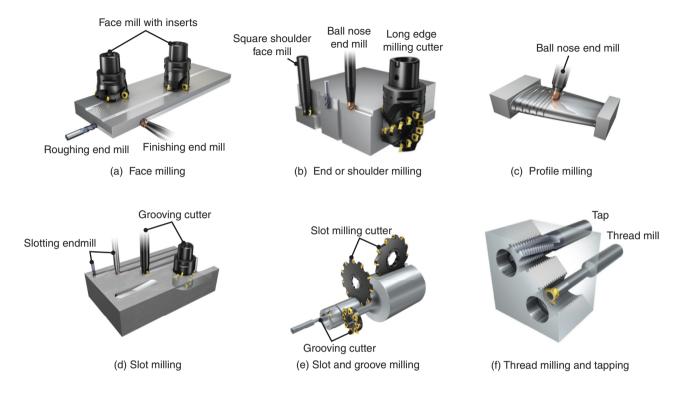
Some basic types of milling cutters and milling operations. (a) Face milling; (b) end or shoulder milling; (c) profile milling; (d) slot milling; (e) slot and groove milling; (f) thread milling and tapping. *Source:* Courtesy of Sandvik Coromant.
